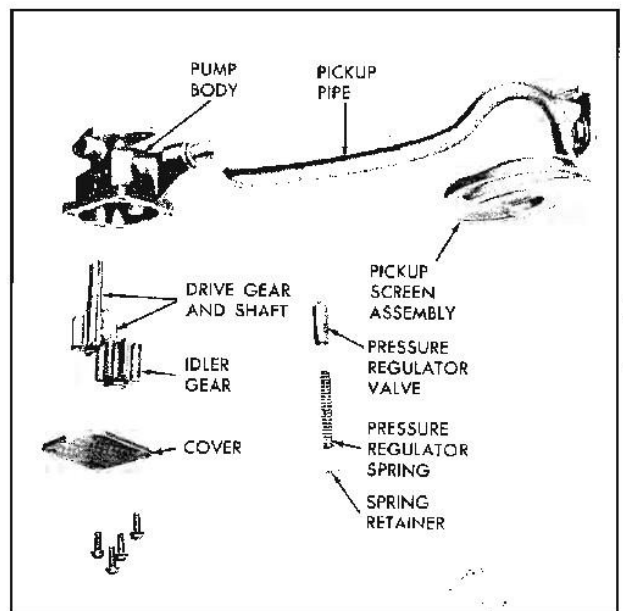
A-9 6 Cyl. Oil Pump Assembly
